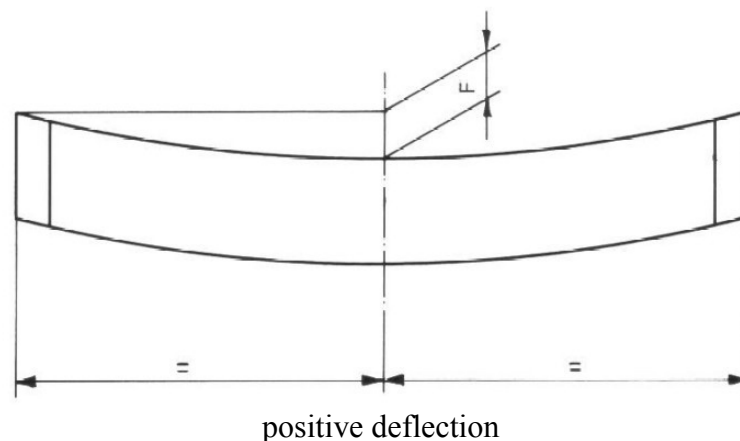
Mounting tolerances for vertical and horizontal frame saws
